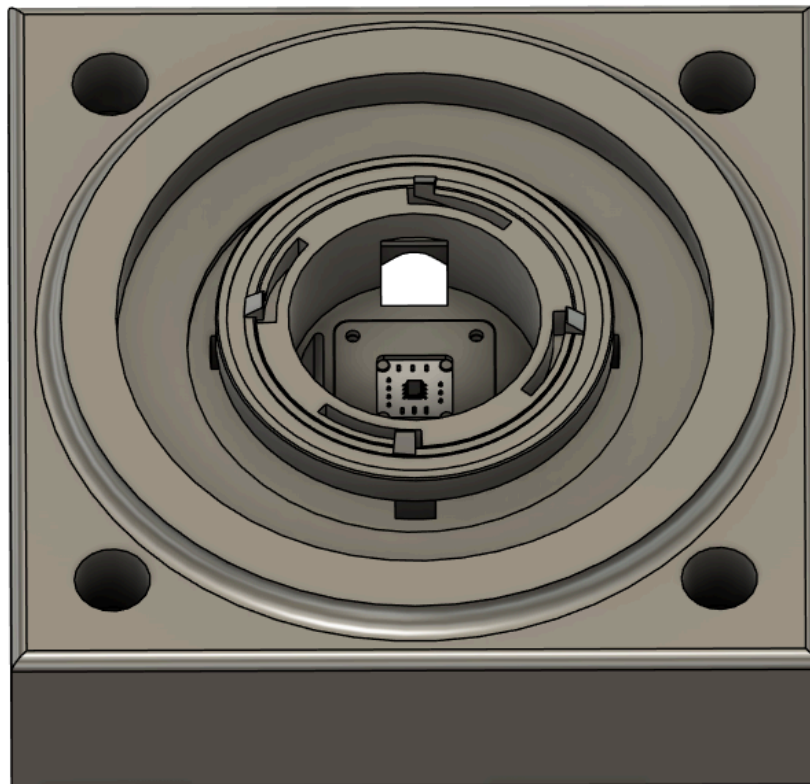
PLA base with encoder mount, cable access, and thrust bearing
